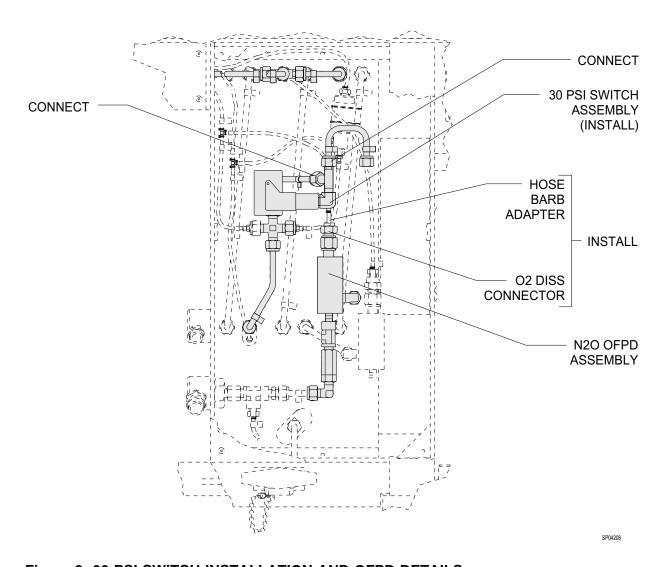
30 PSI SWITCH INSTALLATION AND OFPD DETAILS
